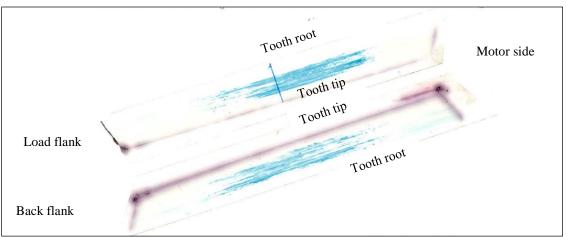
Tape lift record of blue ink check on pinion 1, at the gear manufacturer's shop
